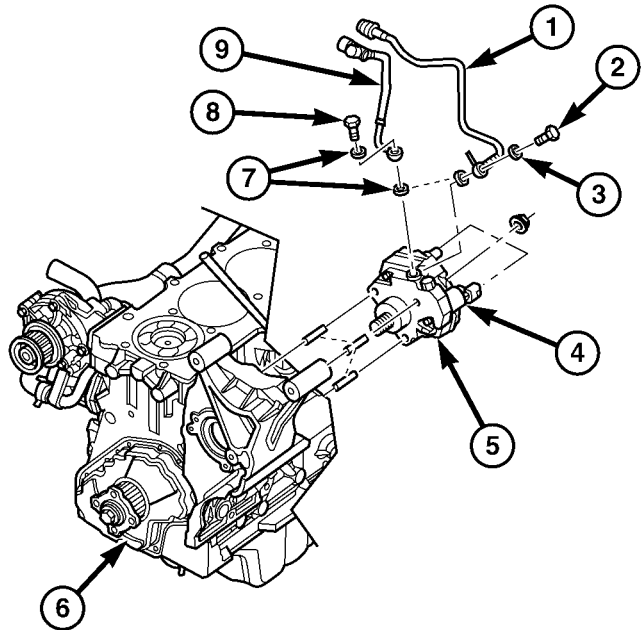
INJECTION PUMP/GEAR REMOVAL USING VM.1067
